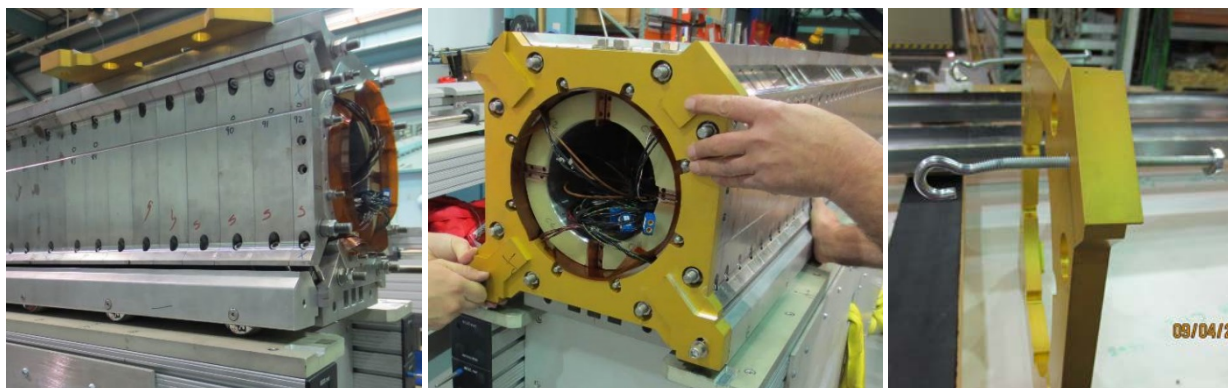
Skate wheels under coil pack (left), end plate attached to skate wheels (center) hooks to attach top of end plate (right)
